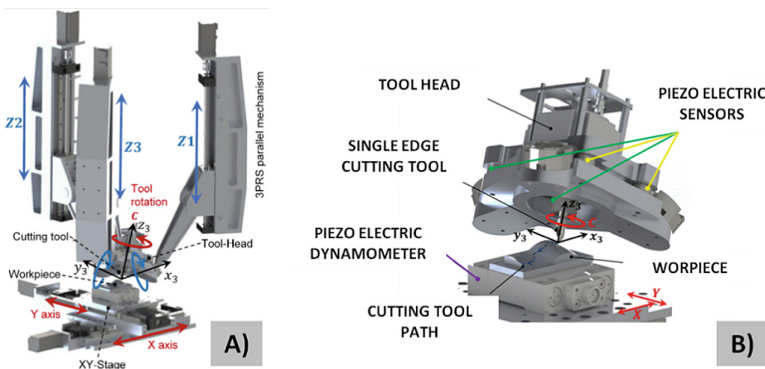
A) 3PRS-XY-C machine tool. B) Schematic representation of the configuration of the tool head in the 3PRS-XY-C machine
